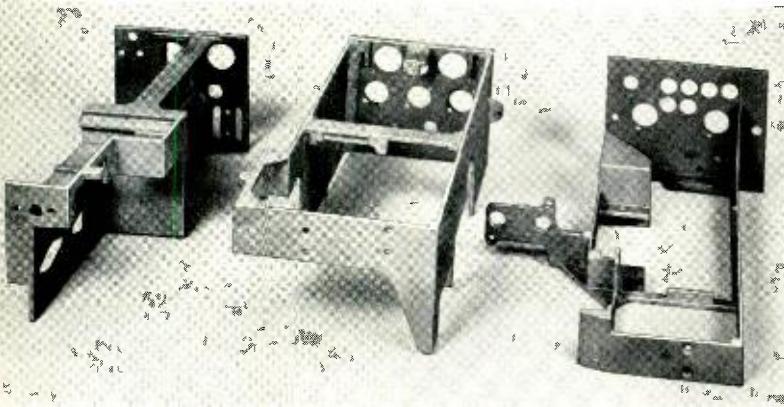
The three aluminum die-castings used for an N1 carrier channel unit.
